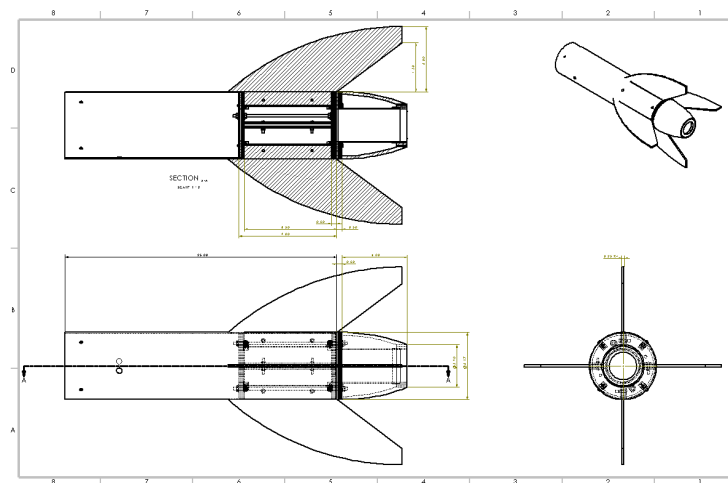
Dimensioned drawing of the assembled fin can with all components.
